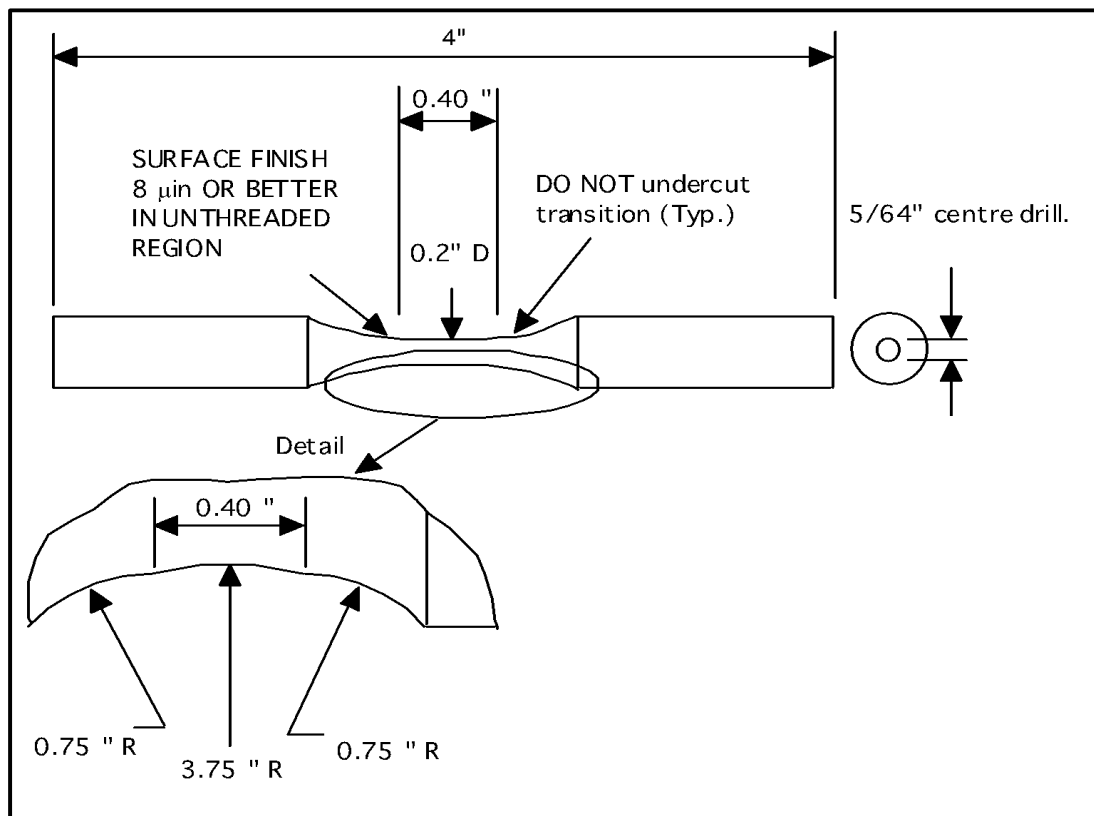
Uni-axial smooth cylindrical fatigue specimen drawing
